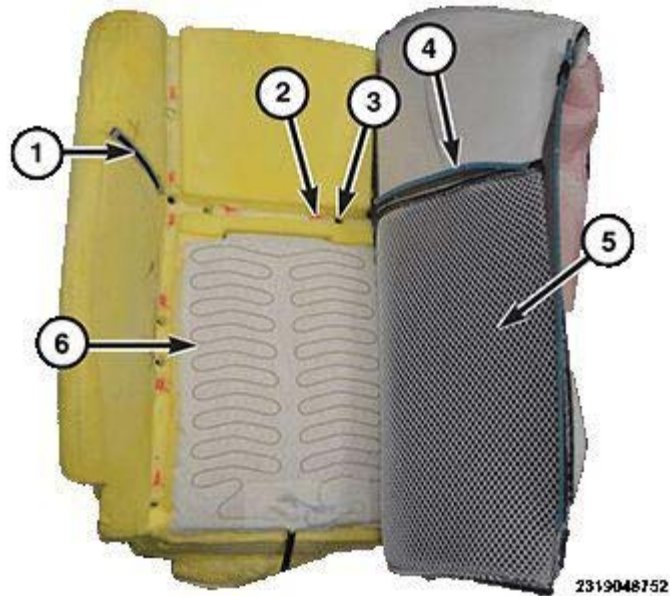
Seat Back Cover, Fastener, Strips & Clips
